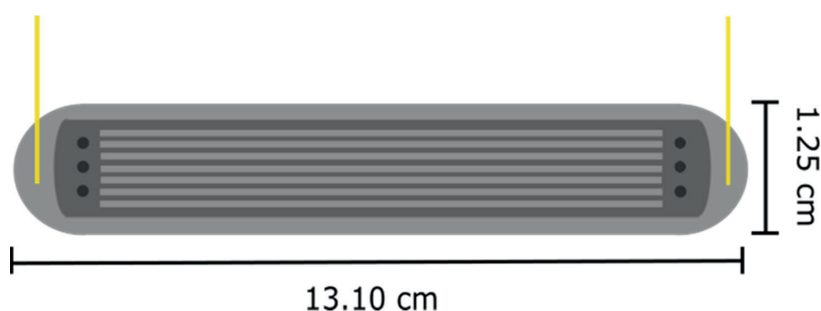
The bipolar plate with parallel flow field. Gold wires were welded to the plate for in situ ICR measurements.
